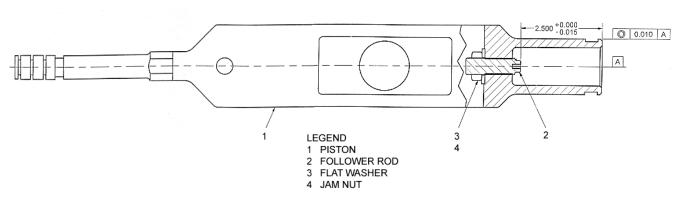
1<sup>st</sup> Stage Piston Assembly.
